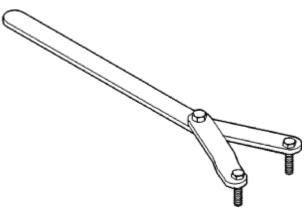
Removing/Installing Torque Converter Bolts Courtesy of CHRYSLER LLC
